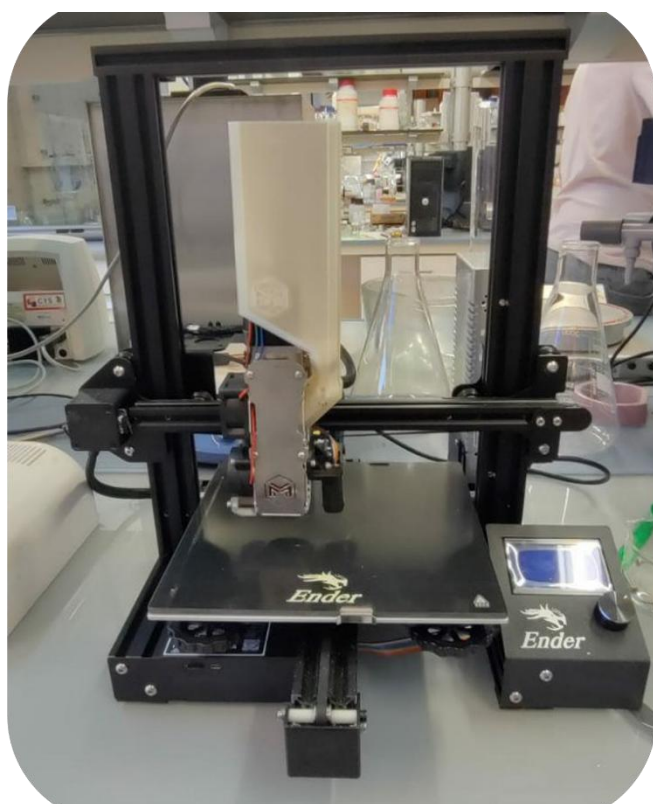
Ender 3 NEO 3D printer with a v4 Universal Pellet Extruder mount
